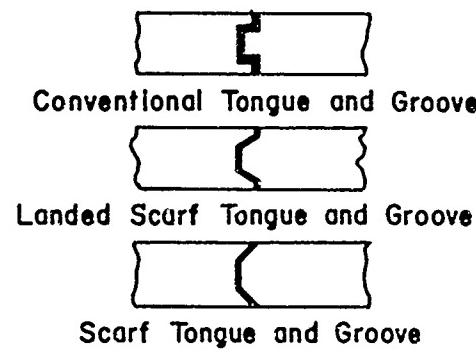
BUTT-JOINT DESIGNS (REF. 24)
